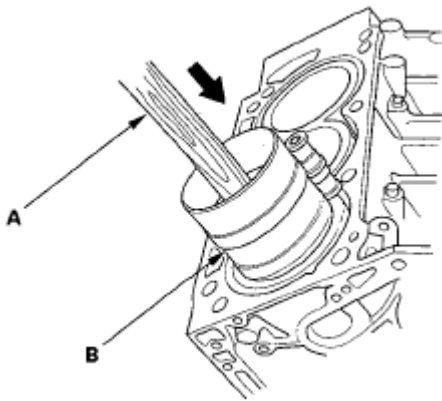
Installing Piston/Connecting Rod Assembly In Cylinder
